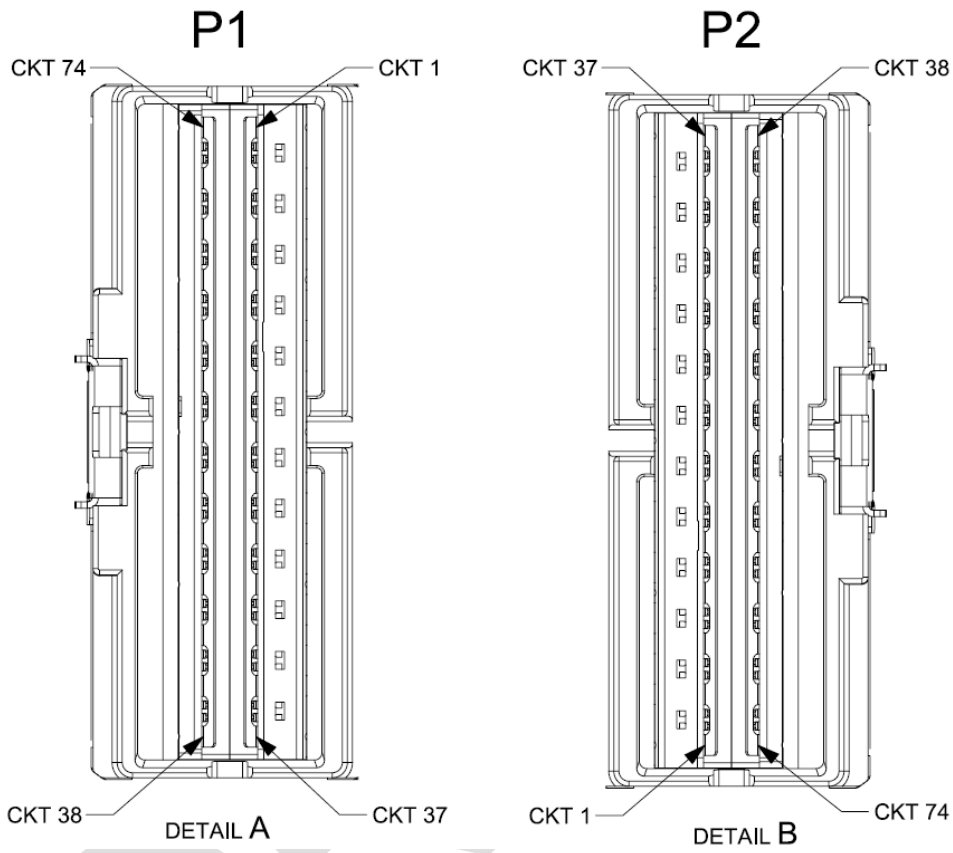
Cable Assembly Free-Side Connector Contact Numbering
